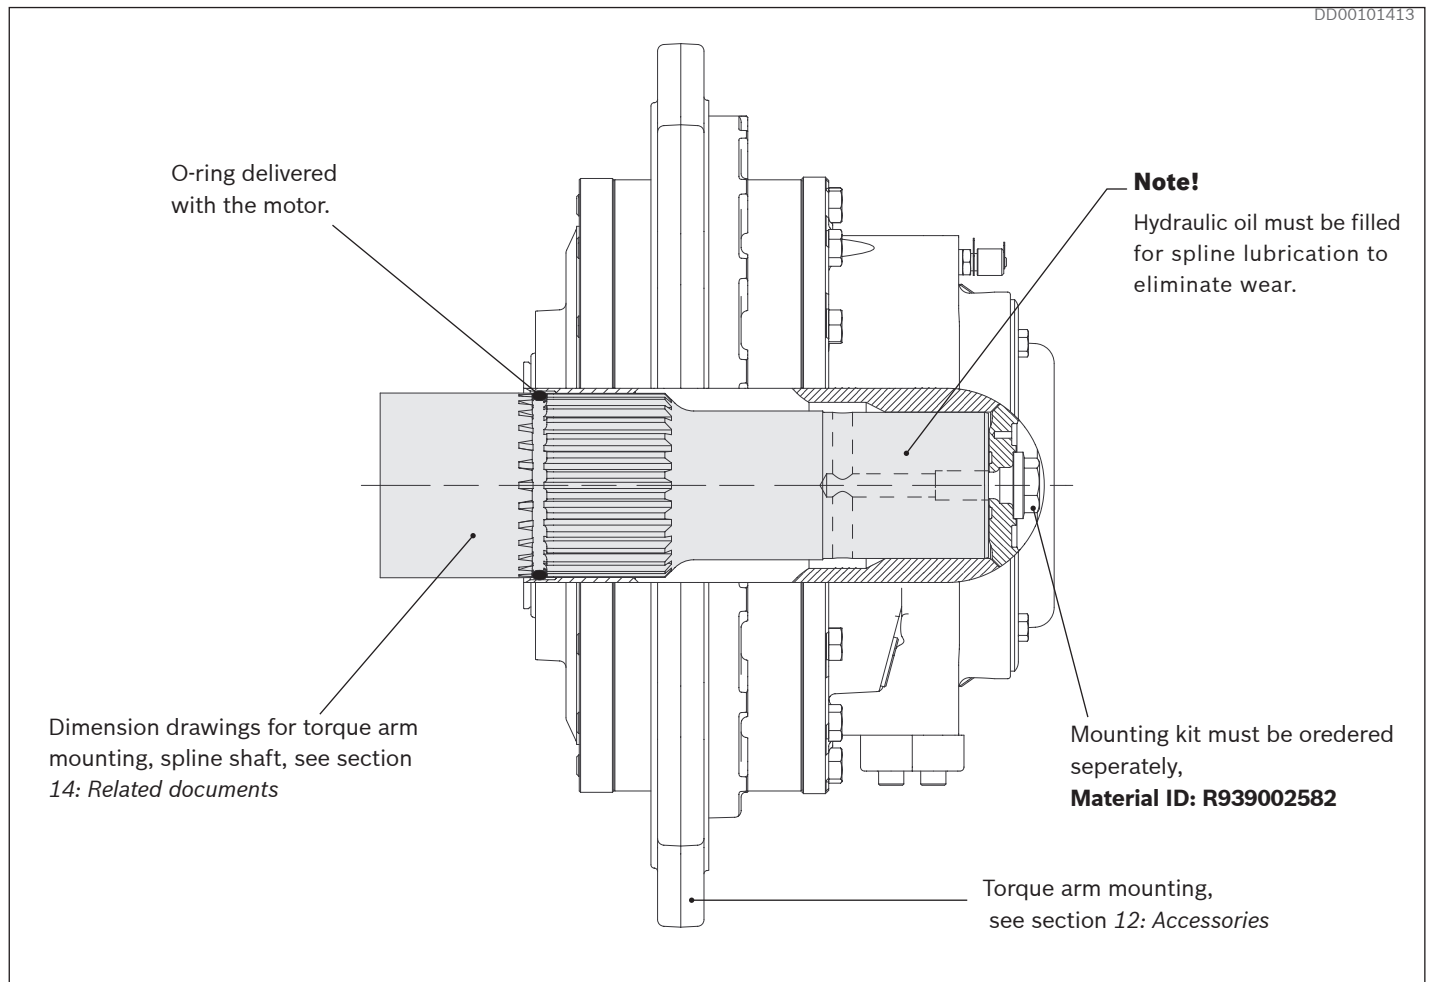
Example: Torque arm mounting of CA 100 with splines
